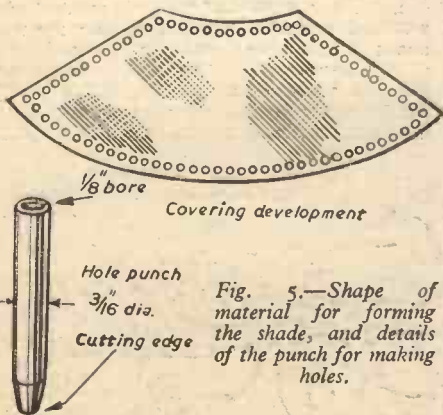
Shape of material for forming the shade, and details of the punch for making holes.
